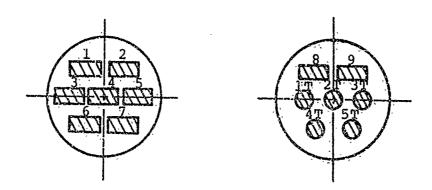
Configuration of Specimen Blank 5Al3 as Received from Coors and Cutting Plan for Removing Phase I Tensile and Flexural Specimens from Blanks 5Al3-101, -102, and -103
